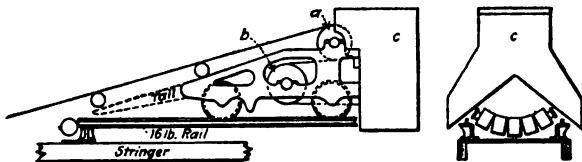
Self-propelling Tripper for Belt Conveyor.
